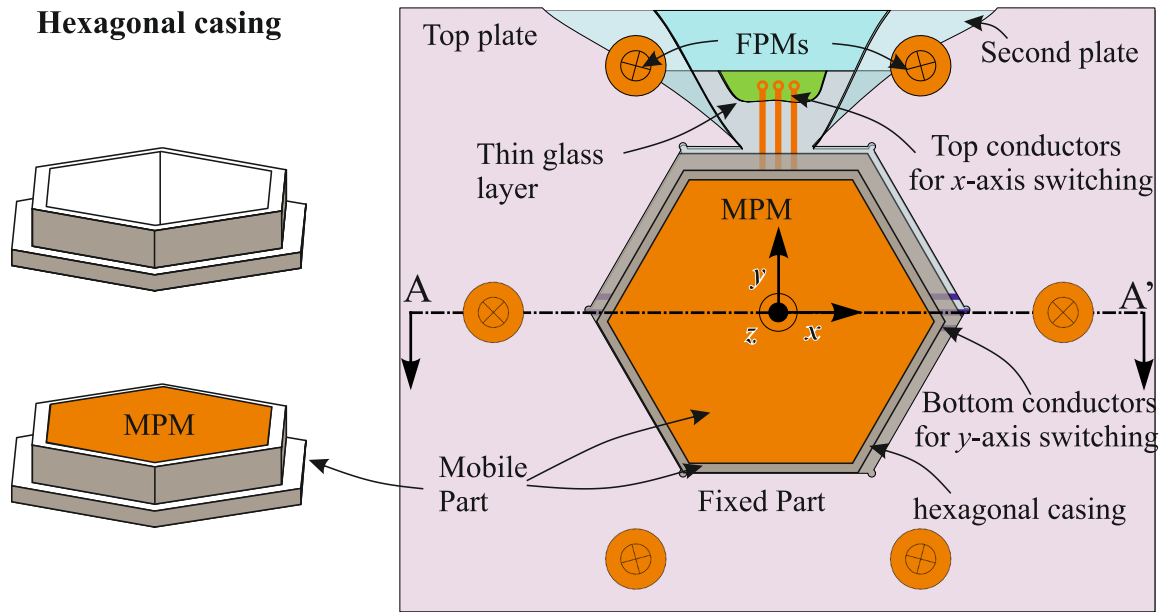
CAD view of hexagonal casing and its assembly
